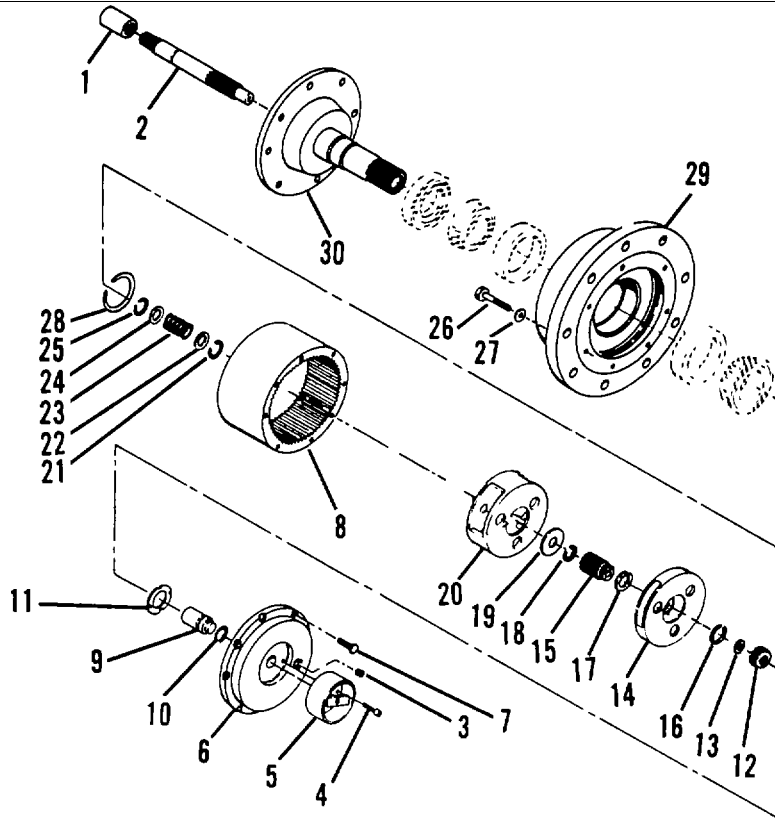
Drive Hub Assembly (Sheet 3 of 3).
